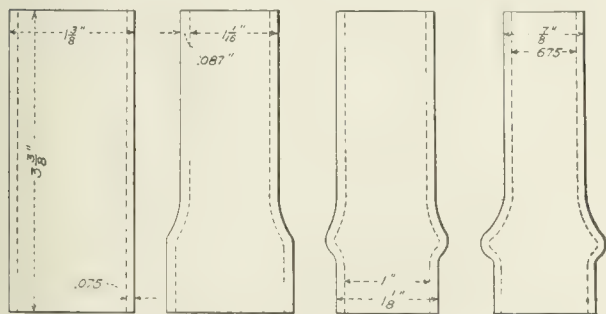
A Specimen Series of Operations Performed on This Machine.
